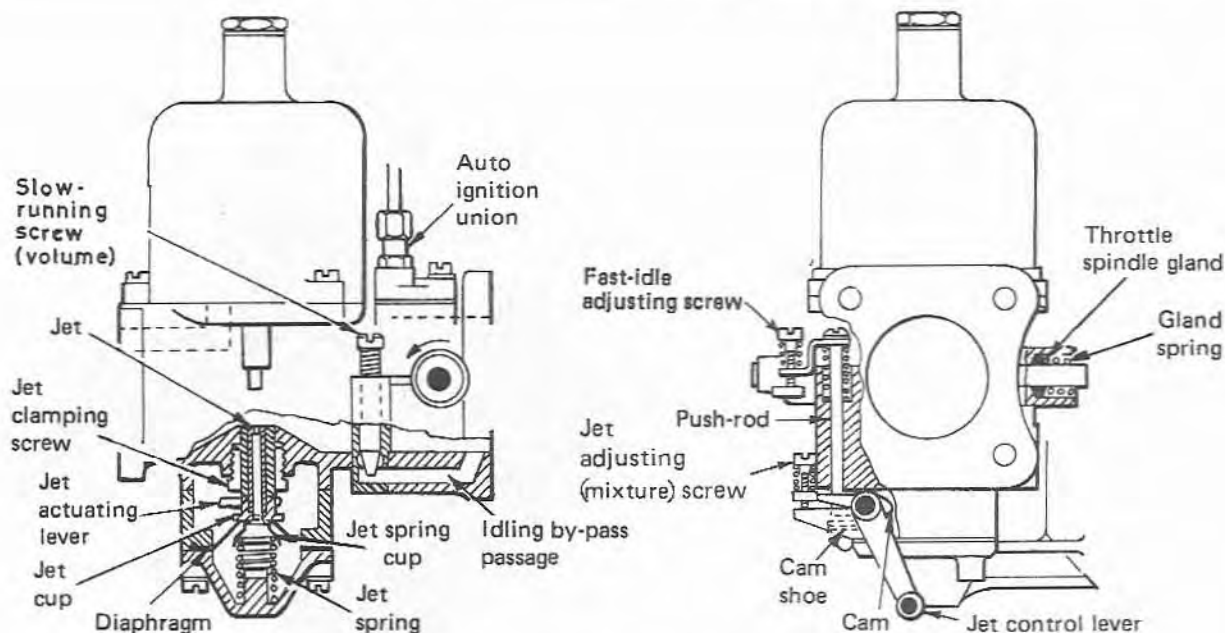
Cutaway view of the Type HD carburettor (Sec 2)
